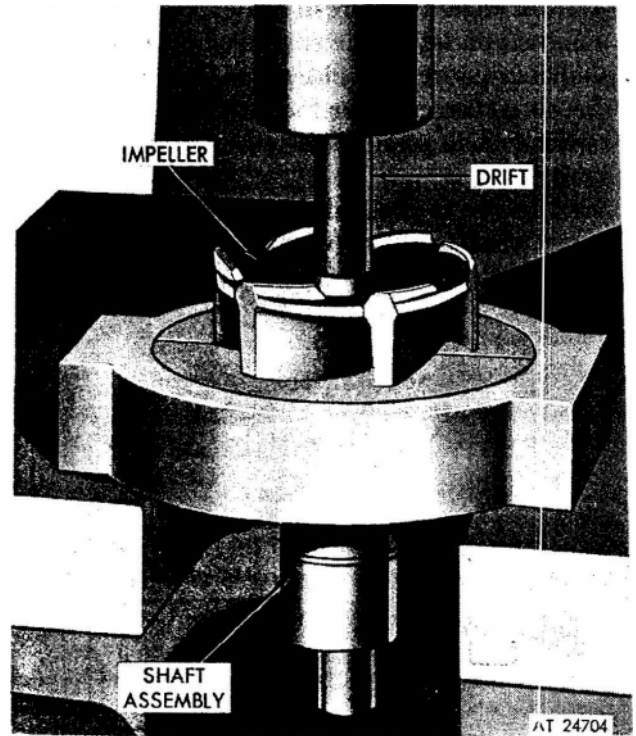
Removing shaft from impeller with tools J 8329 and J 358-1.
